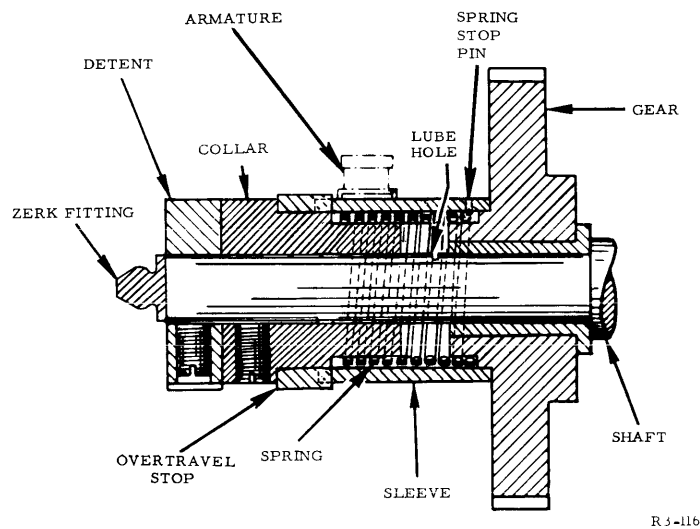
Clutch Mechanism Cutaway -- Side View.
